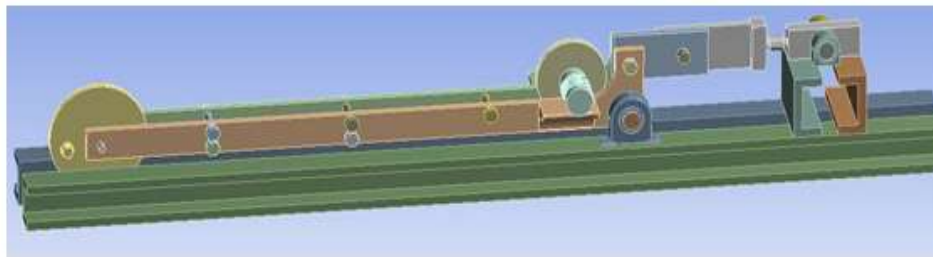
CRE- O model of bolted joint testing rig for Shear Attachment
